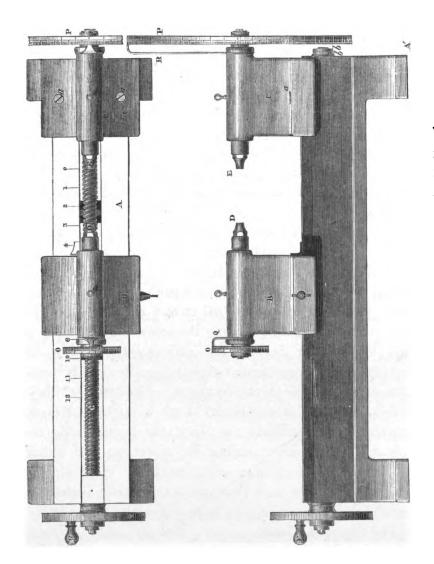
Plan and Elevation of the Workshop Measuring Machine (\$\frac{1}{6}\$).
